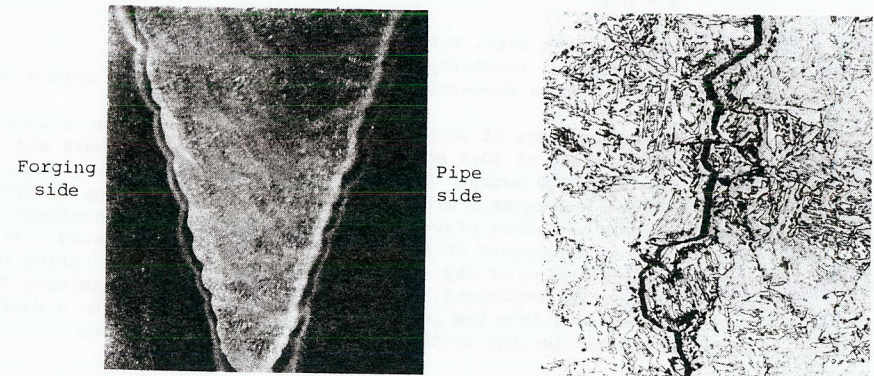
(a) Forging to pipe weld, x 0.8. (b) HAZ intergranular creep crack, x 200
